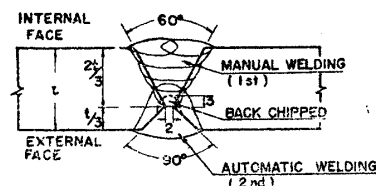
Details of the edge preparation and weld metal of circumferential joint of hull plates welded in the shop.
